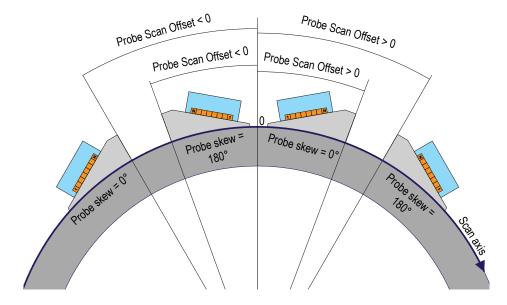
Disc or wheel inspection with 0° and 180° probe skews
